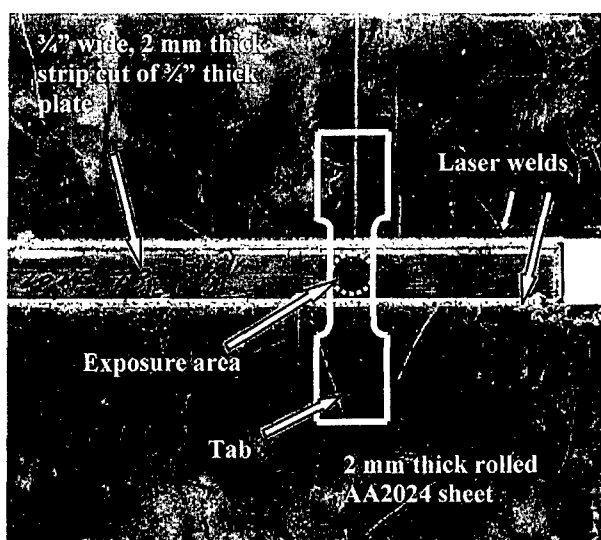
Laser welded sheet sample for AA2024-T3 in the L-S orientation.
